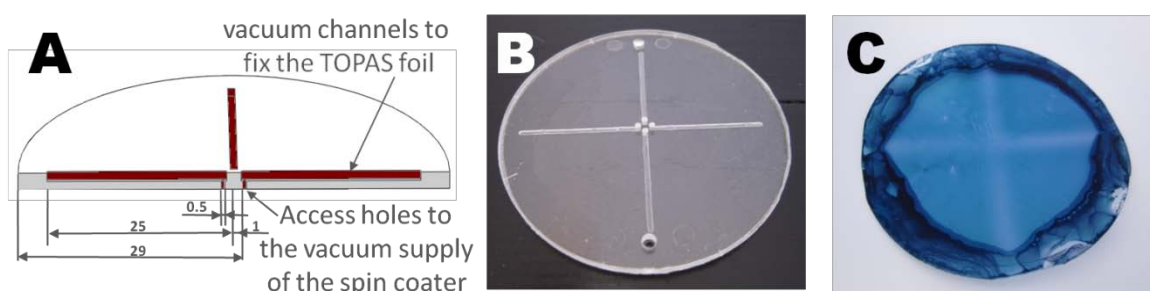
A) Sketch of the fabricated chuck with four open vacuum channels (red) to attach the TOPAS foil during spin coating, B) Photograph of the fabricated PMMA chuck, and C) coated TOPAS foil with polymerized PEDOT film. Chuck marks are visible as bright blue lines across the foil.
